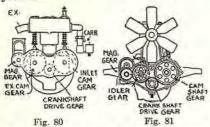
Showing method of driving the two cam shafts and magneto on a "T"-head engine. Note the two cam gears and shafts.
